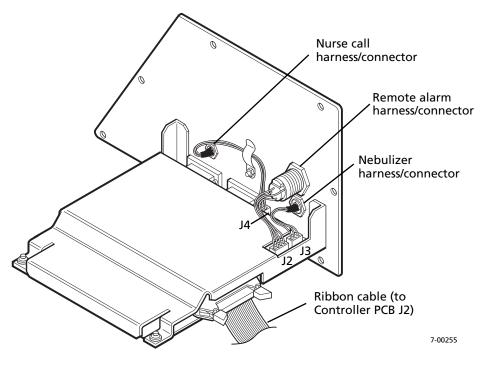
Removing harnesses/connectors from Communications option assembly
